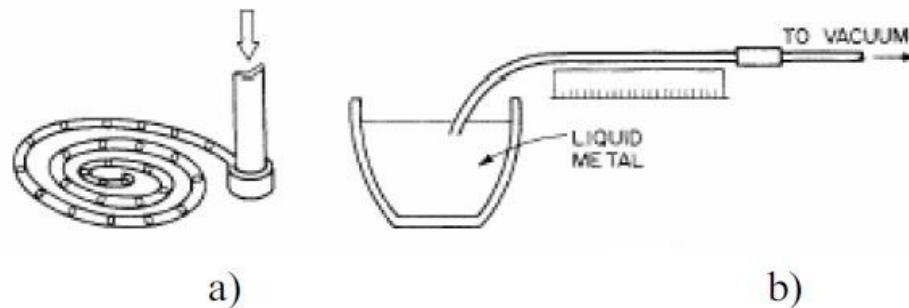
Schematic view of (a) spiral test and (b) vacuum test [1]
